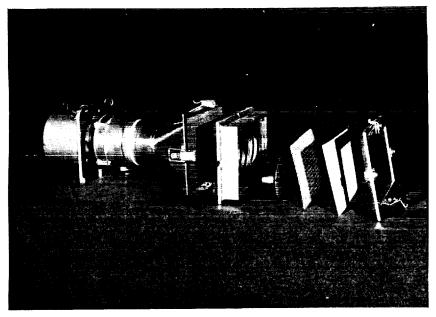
Exploded view of high volume air sampler showing pump and transition piece, sampling head, charcoal cartridges, spacer screen, filter paper, and retainer frame
